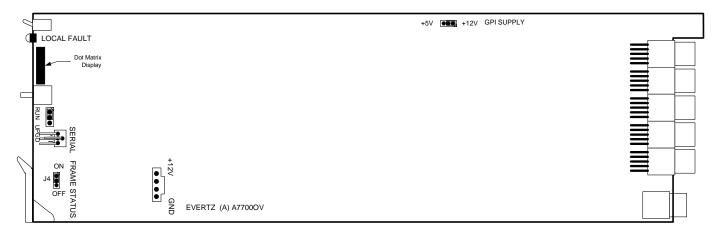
Location of Jumpers Bottom Board (A7700OV)
